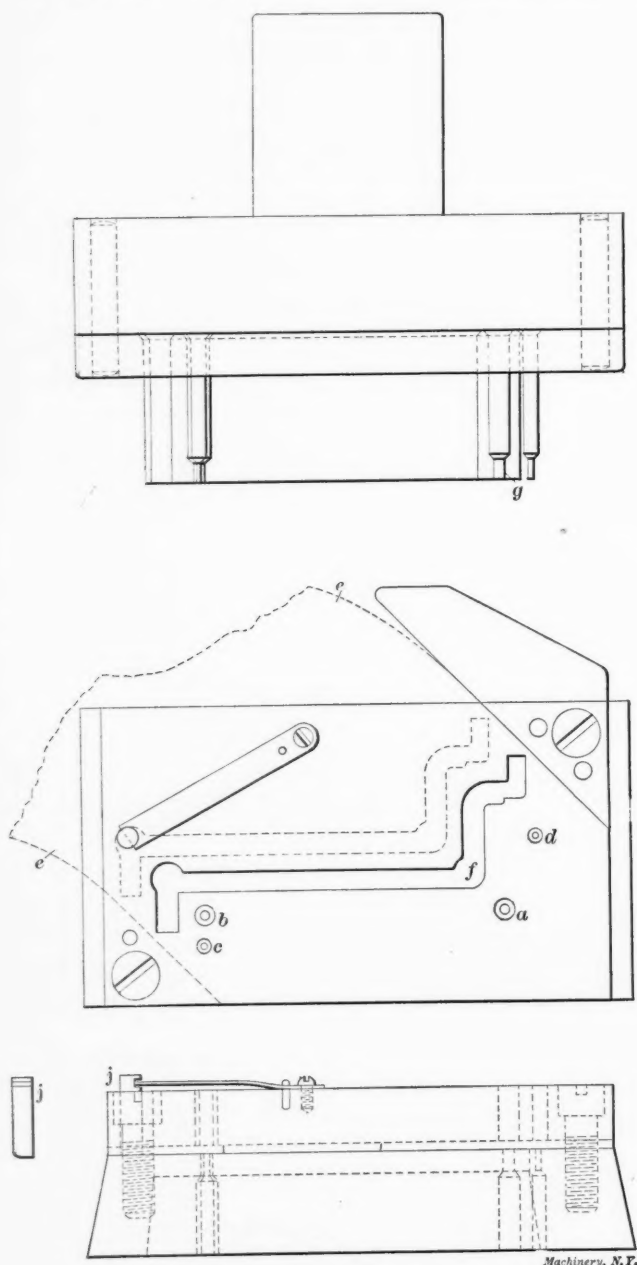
Punch and Die for Making Blank shown in Fig. 1.
